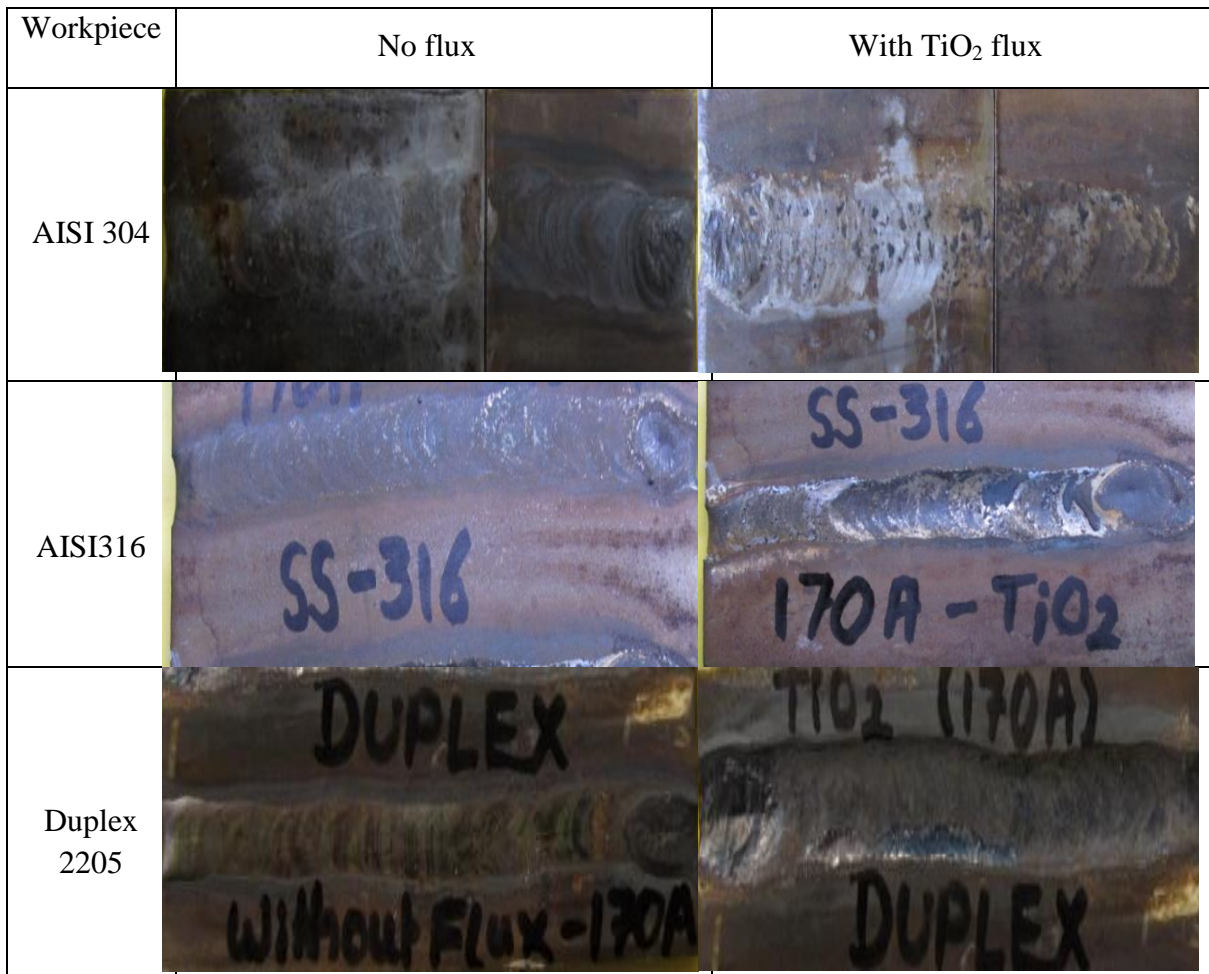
Macrographs showing the bead appearance for AISI 304 , AISI 316 and Duplex 2205 stainless steel at 170 A with and without flux using Ar shielding with flow rate of 10 L/min.
